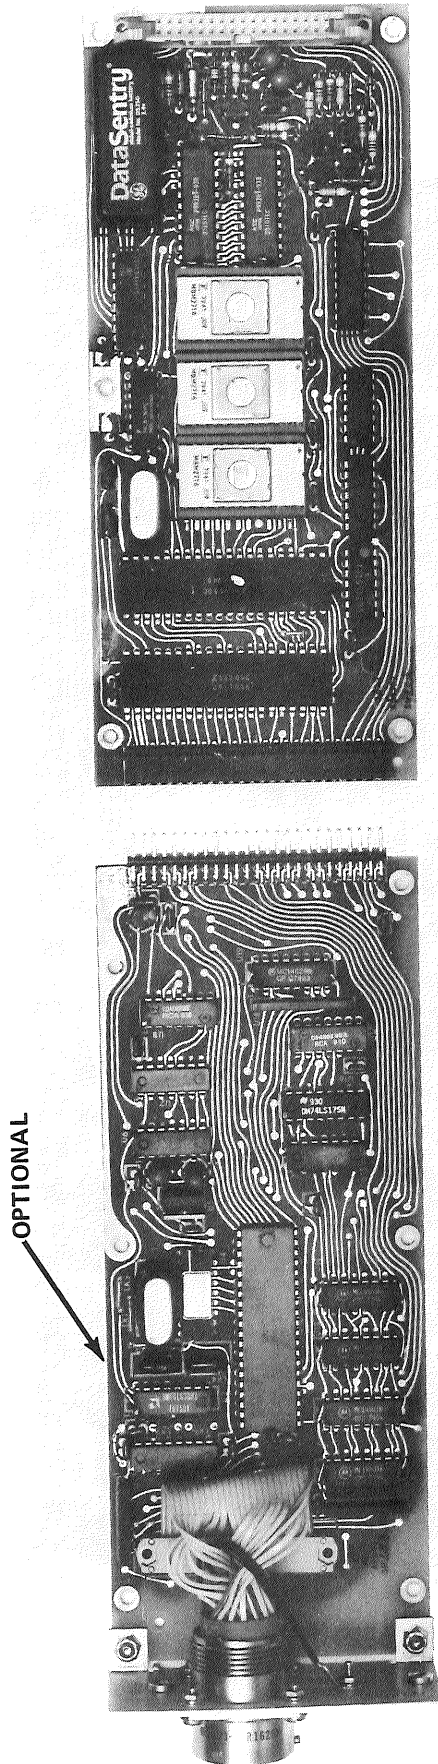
Mating A6A1 and A6A2 Circuit Card Assemblies
